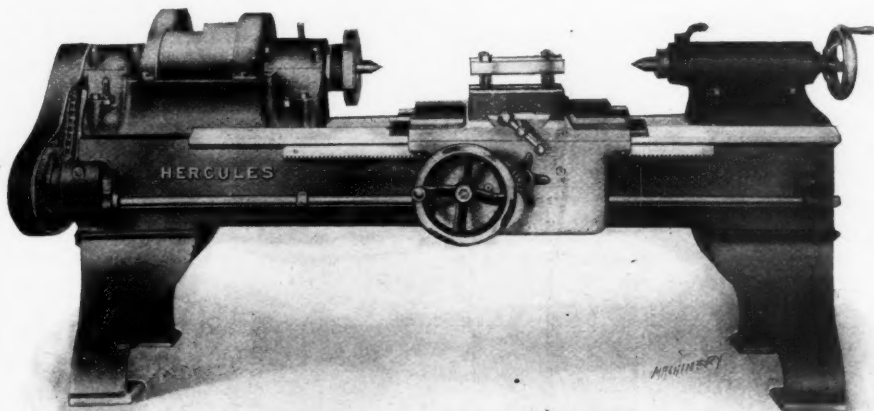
Himoff Single-purpose Lathe equipped with Cone Pulley and Back-gears
